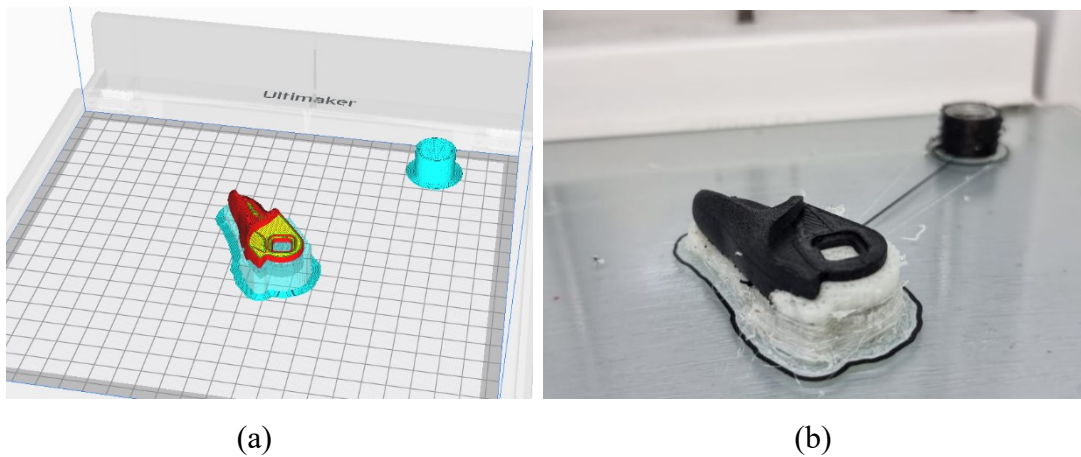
(a) Simulation in Creality Slicer of one of the 3D-printed parts printed with the shaft supports oriented parallel to the printing bed and (b) the printing of a part with dissolvable supports
